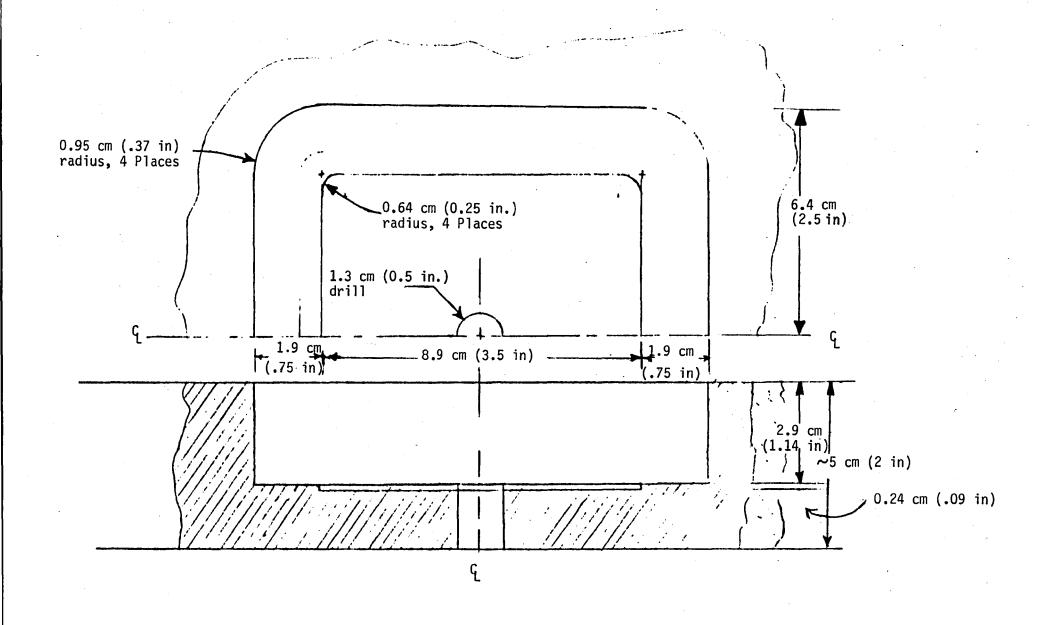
Details of Tool Cavities of Aluminum Holder Used to Contain Ceramic Porous Tools
